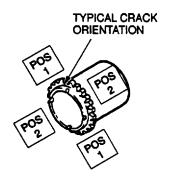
Tail Rotor Gearbox Inner Coupling
